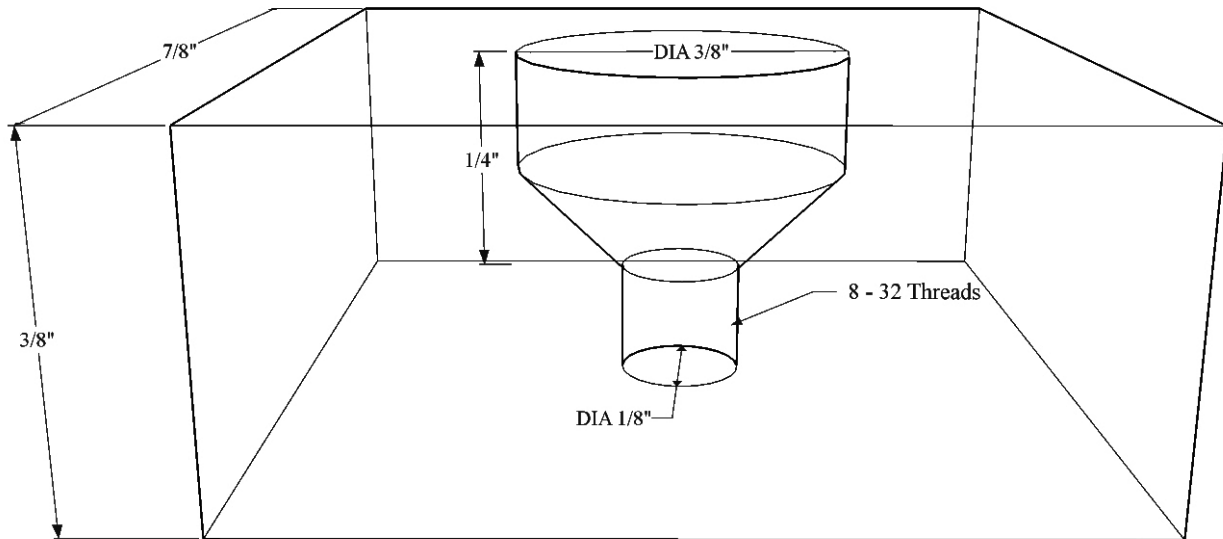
Side view of a wire frame model of Al jig and capsule holder.
